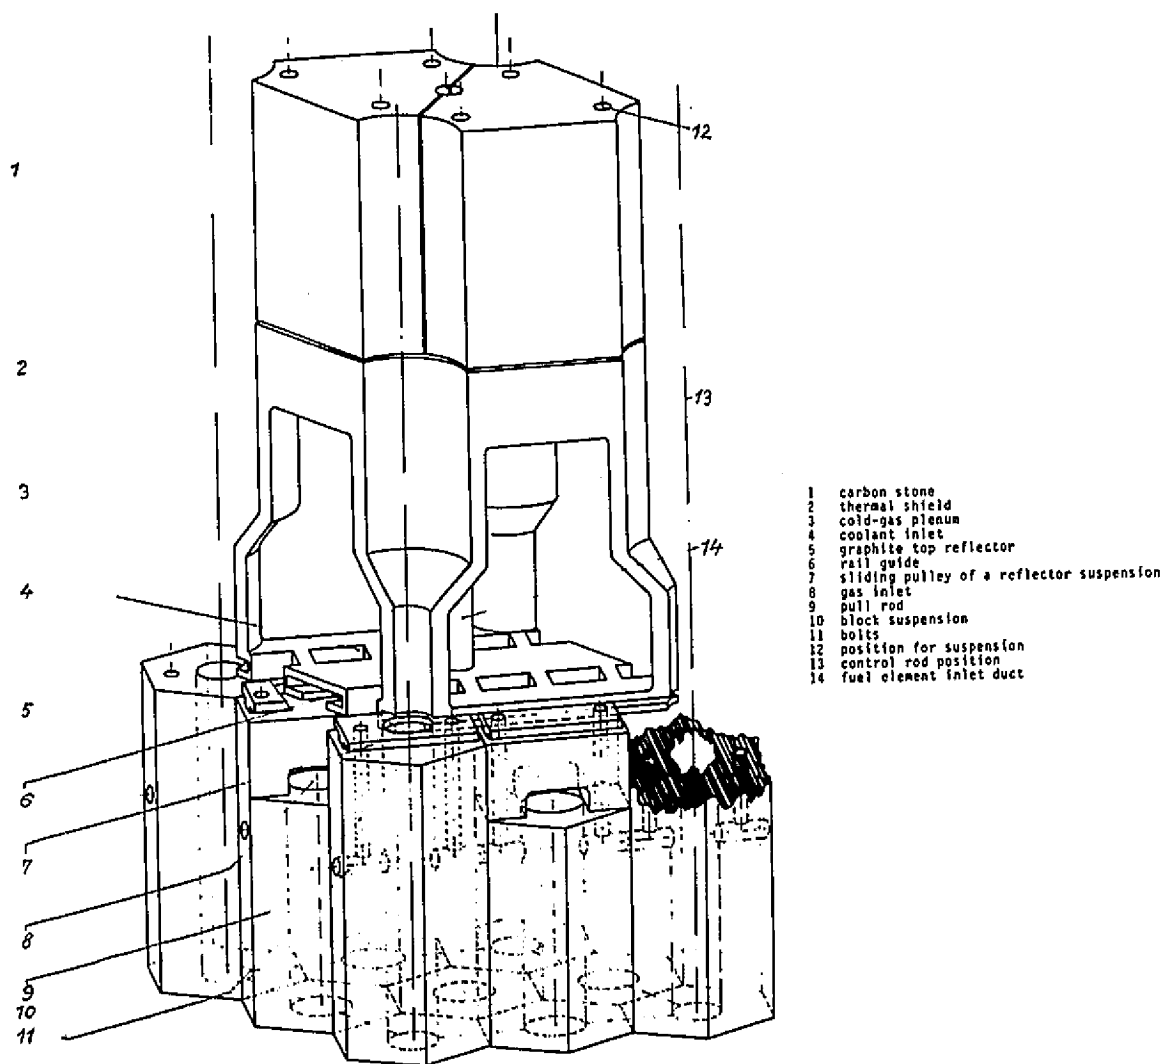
Typical Design of Top of a HTR with Ball-Shaped Fuel Elements
